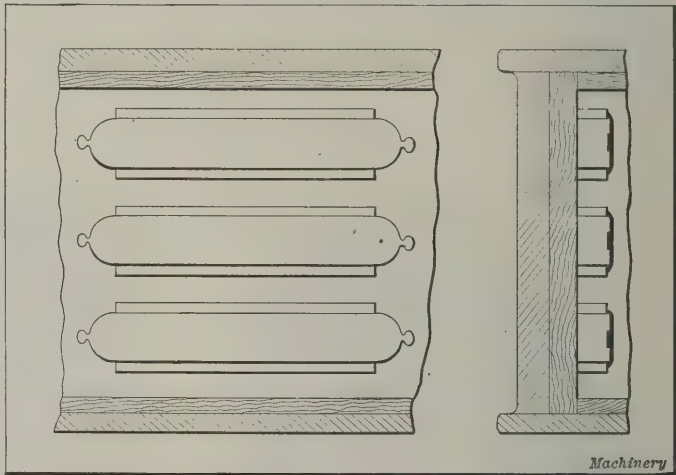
Section of Barrel to show Method of Mounting Large Work
